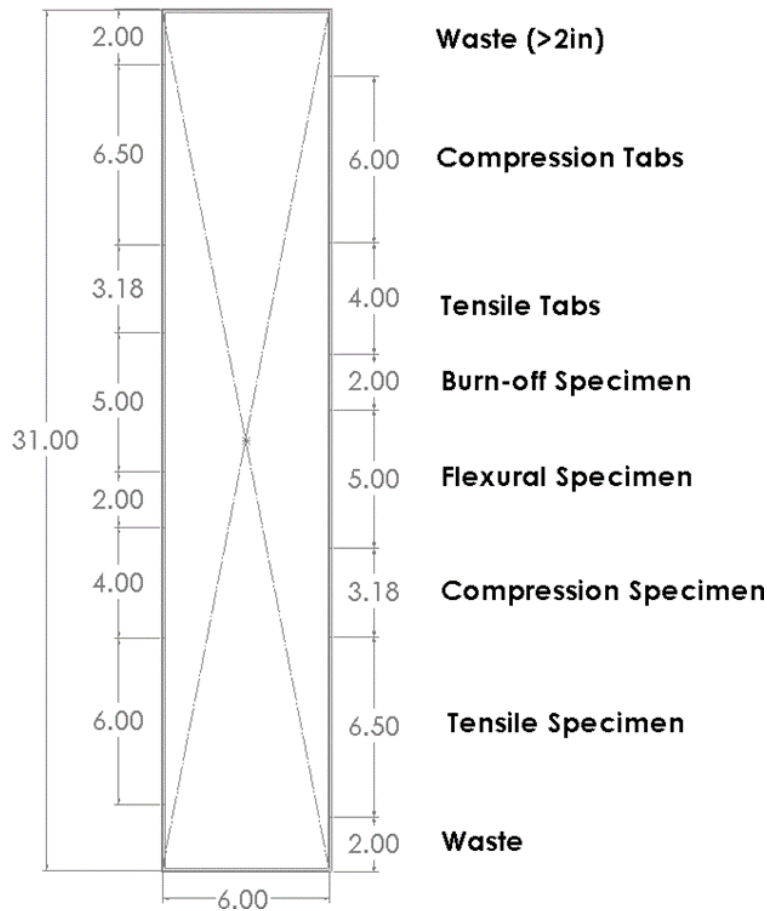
Printed rectangle from which strength specimens were cut. Dimensions are shown in inches.
